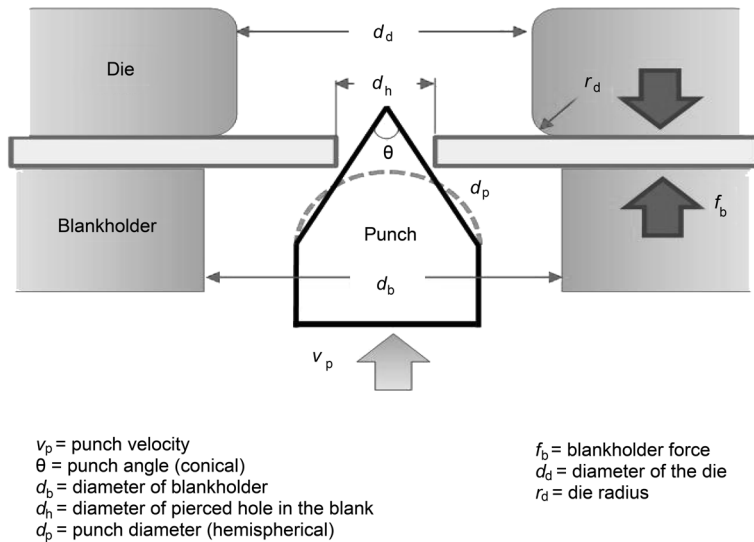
Schematic of a hole expansion test with a conical punch used to evaluate how far a sheet sample can be flanged without fracture. Source: Ref 2.25
